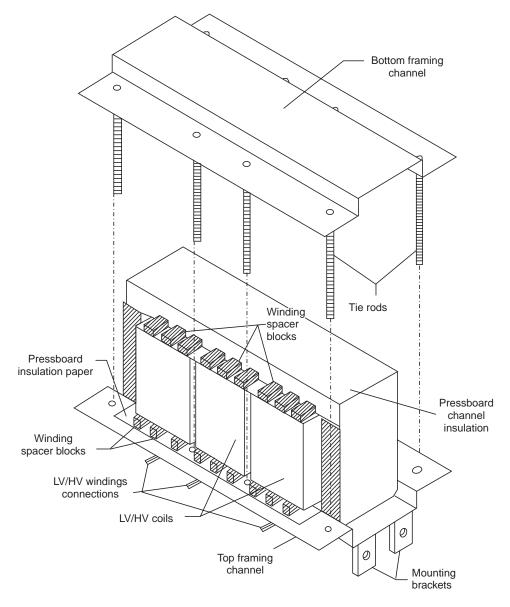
AMDT core/coil assembly (final framing fixture)
